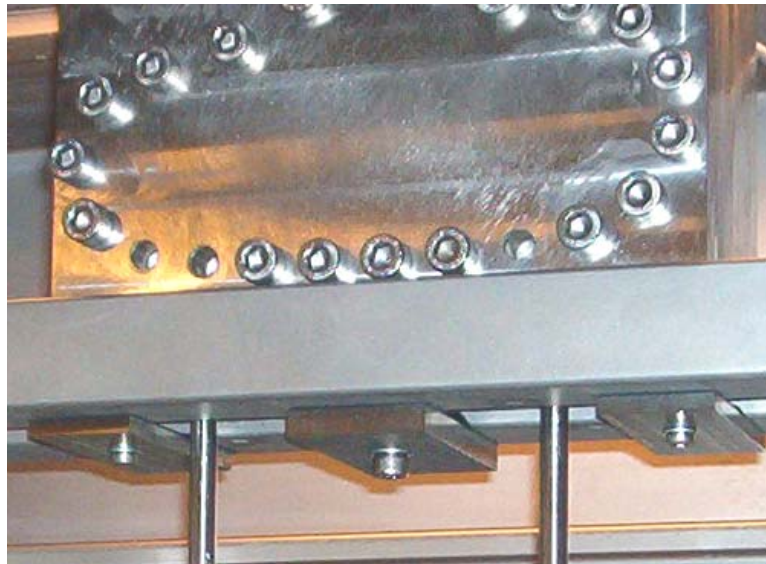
Underside view of how the steel block is fastened by using metal pieces and bolts. The block is seen here with the front plate screwed in place. Tubes for the hangdown wires are also seen in place.
